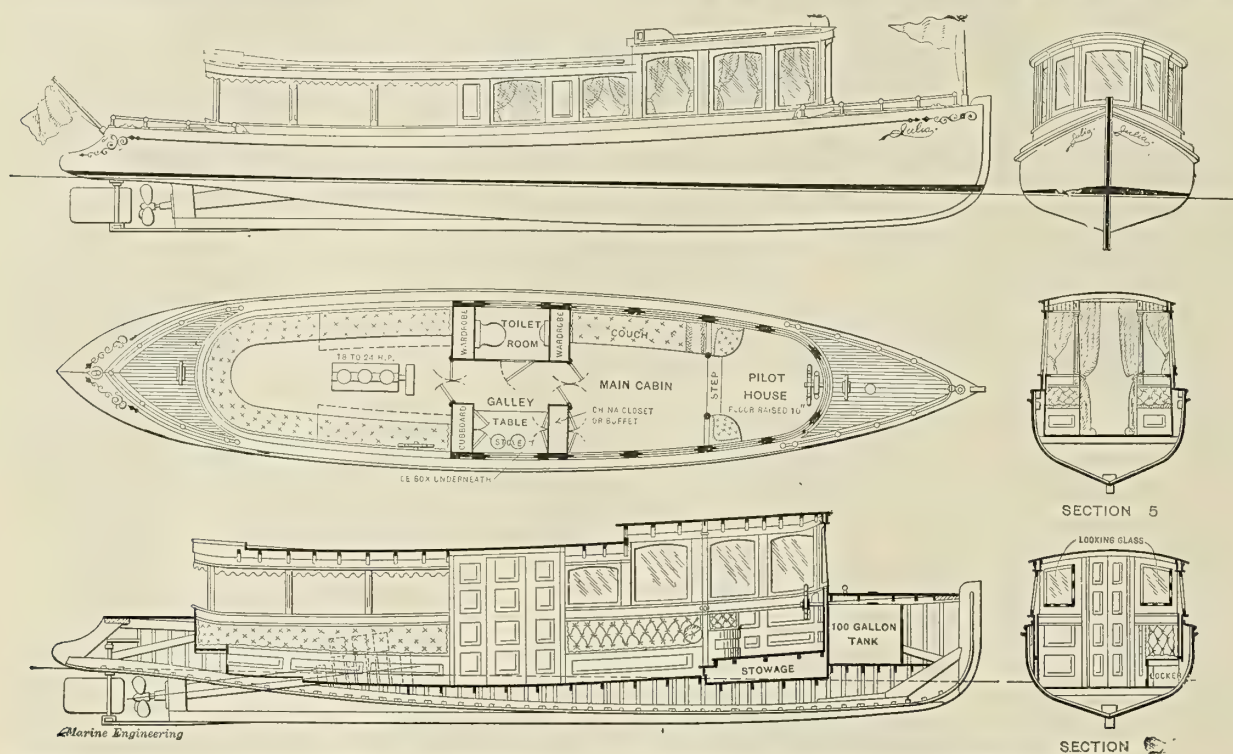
INBOARD AND OUTBOARD PROFILES, ACCOMMODATION PLAN, AND SECTIONS OF 41-FOOT WOLVERINE CRUISING LAUNCH.
